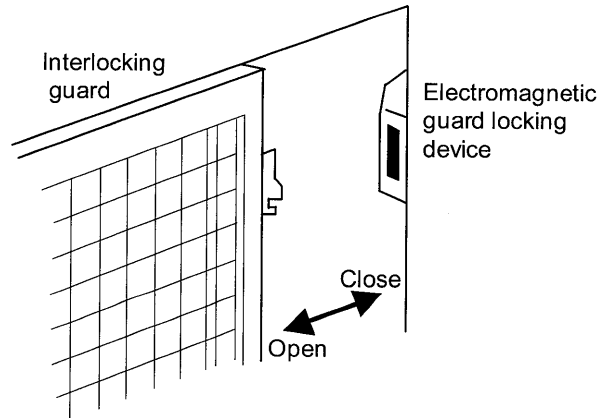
The interlocking guard with guard locking for the CNC lathe.
